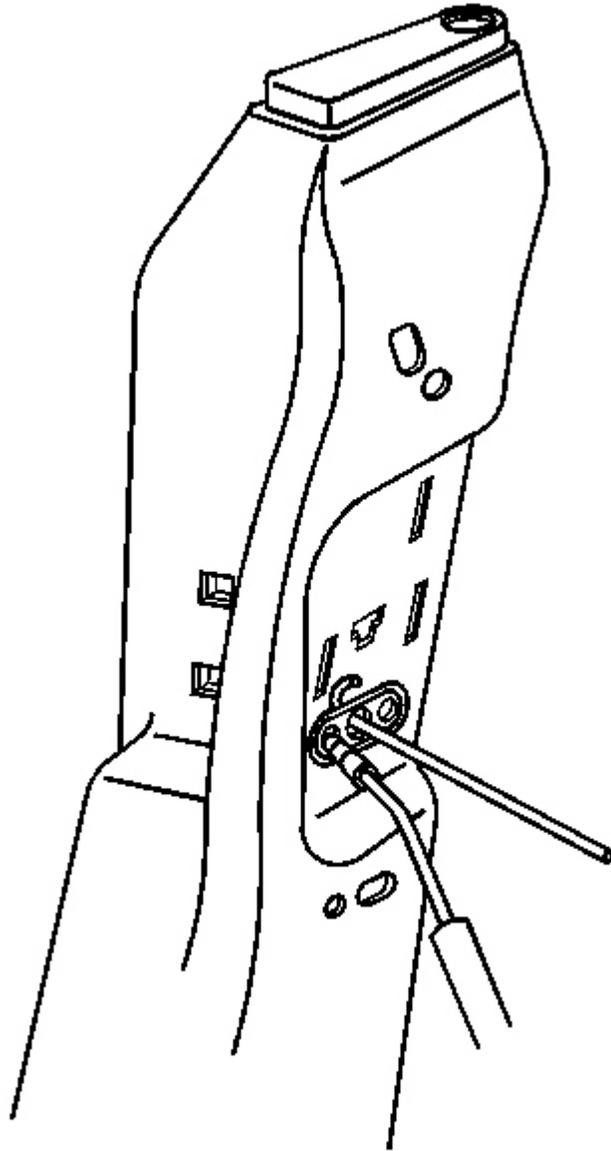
Anchor Plate, Lock Pillar & Stiff Wire
